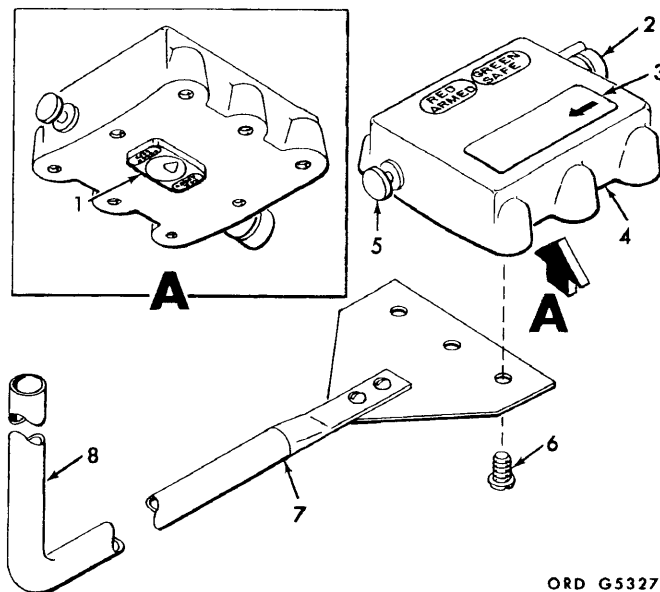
Removal and installation of safety-and-arming switch S31.
